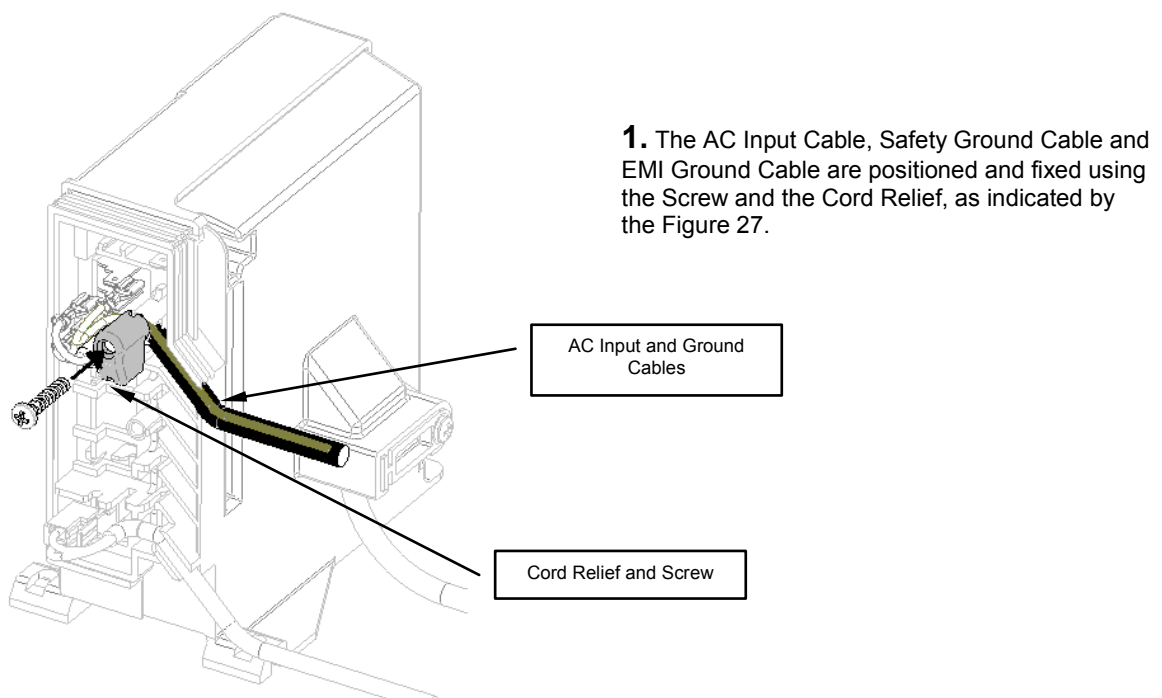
AC Input Cable and Ground Cables positioning and fixing.
